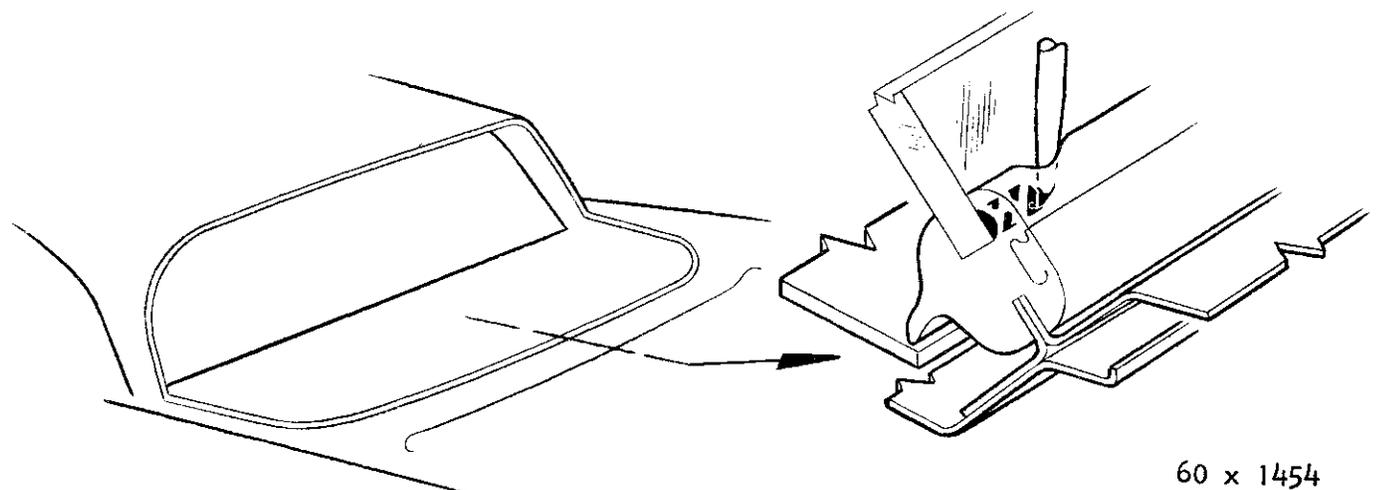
Rear Window Weatherstrip Sealing (Lower)
